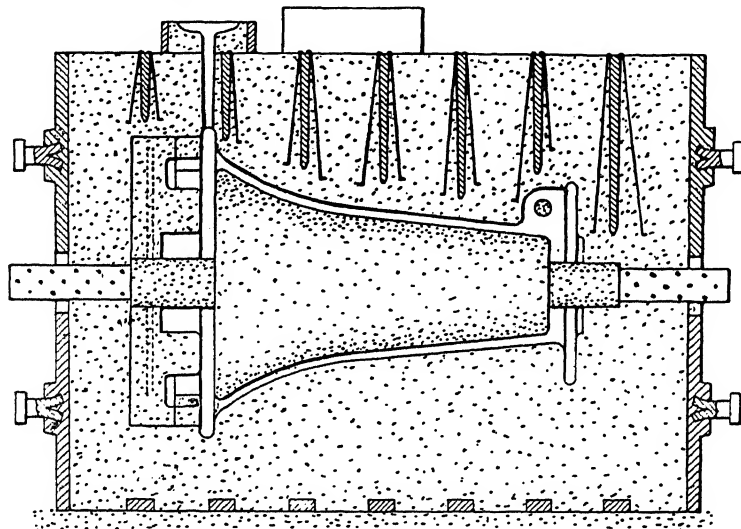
A Cored-up Mould for a Fusee Barrel
